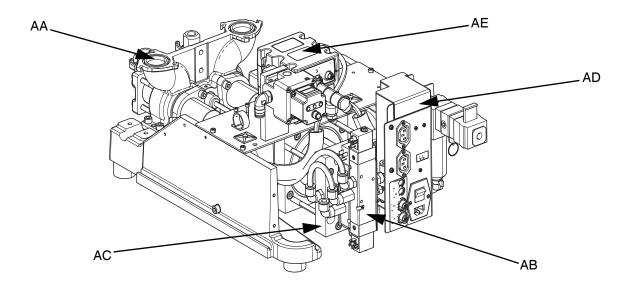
PR70f Rear View with Shield, Tanks, Dispense Valve, and ADM Removed
